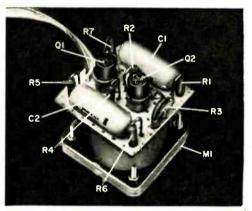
The electronic circuitry is first put together on a suitable sized circuit board, and the assembly is mounted on the back of the meter case. You could also house the circuit board separately.
